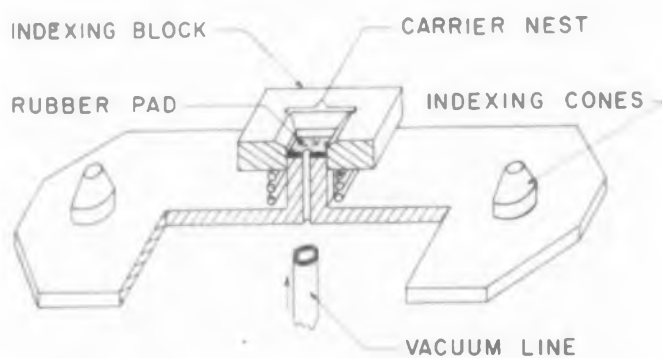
Carrier assembly for conveying and indexing wafers. Indexing block is in raised position.
